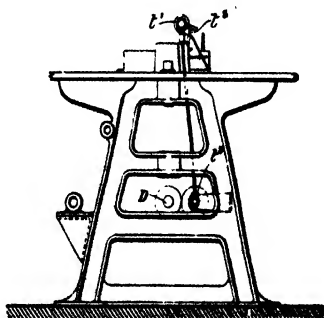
Tea Packetting or Parcel-ling Machine (side elevation of folding and discharging device).
